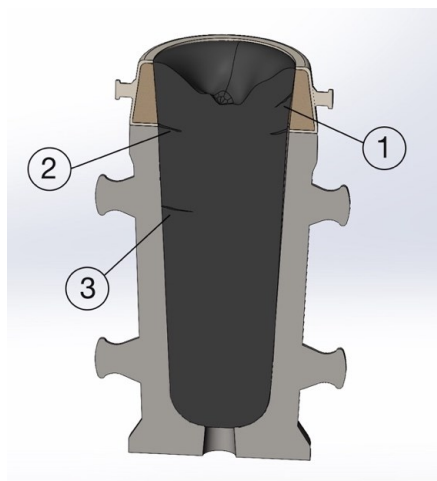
Transverse cracks in a steel ingot (1 – hot top crack, 2 – "sub" hot top crack, 3 - ingot body crack).
